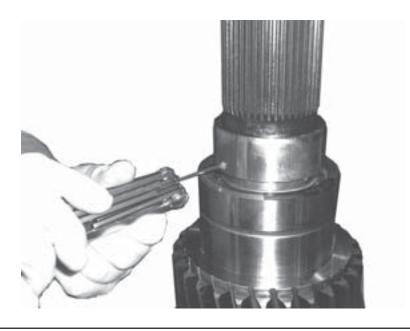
Remove Oil Seal Sleeve with O-Ring from Shaft
